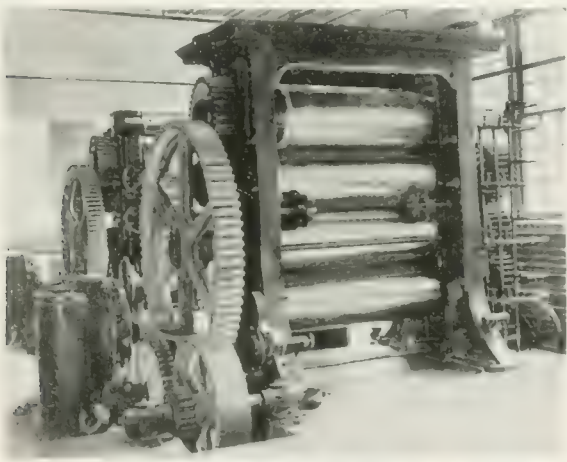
A FOUR-ROLL CALENDER DRIVEN BY A SQUIRREL-CAGE INDUCTION MOTOR
